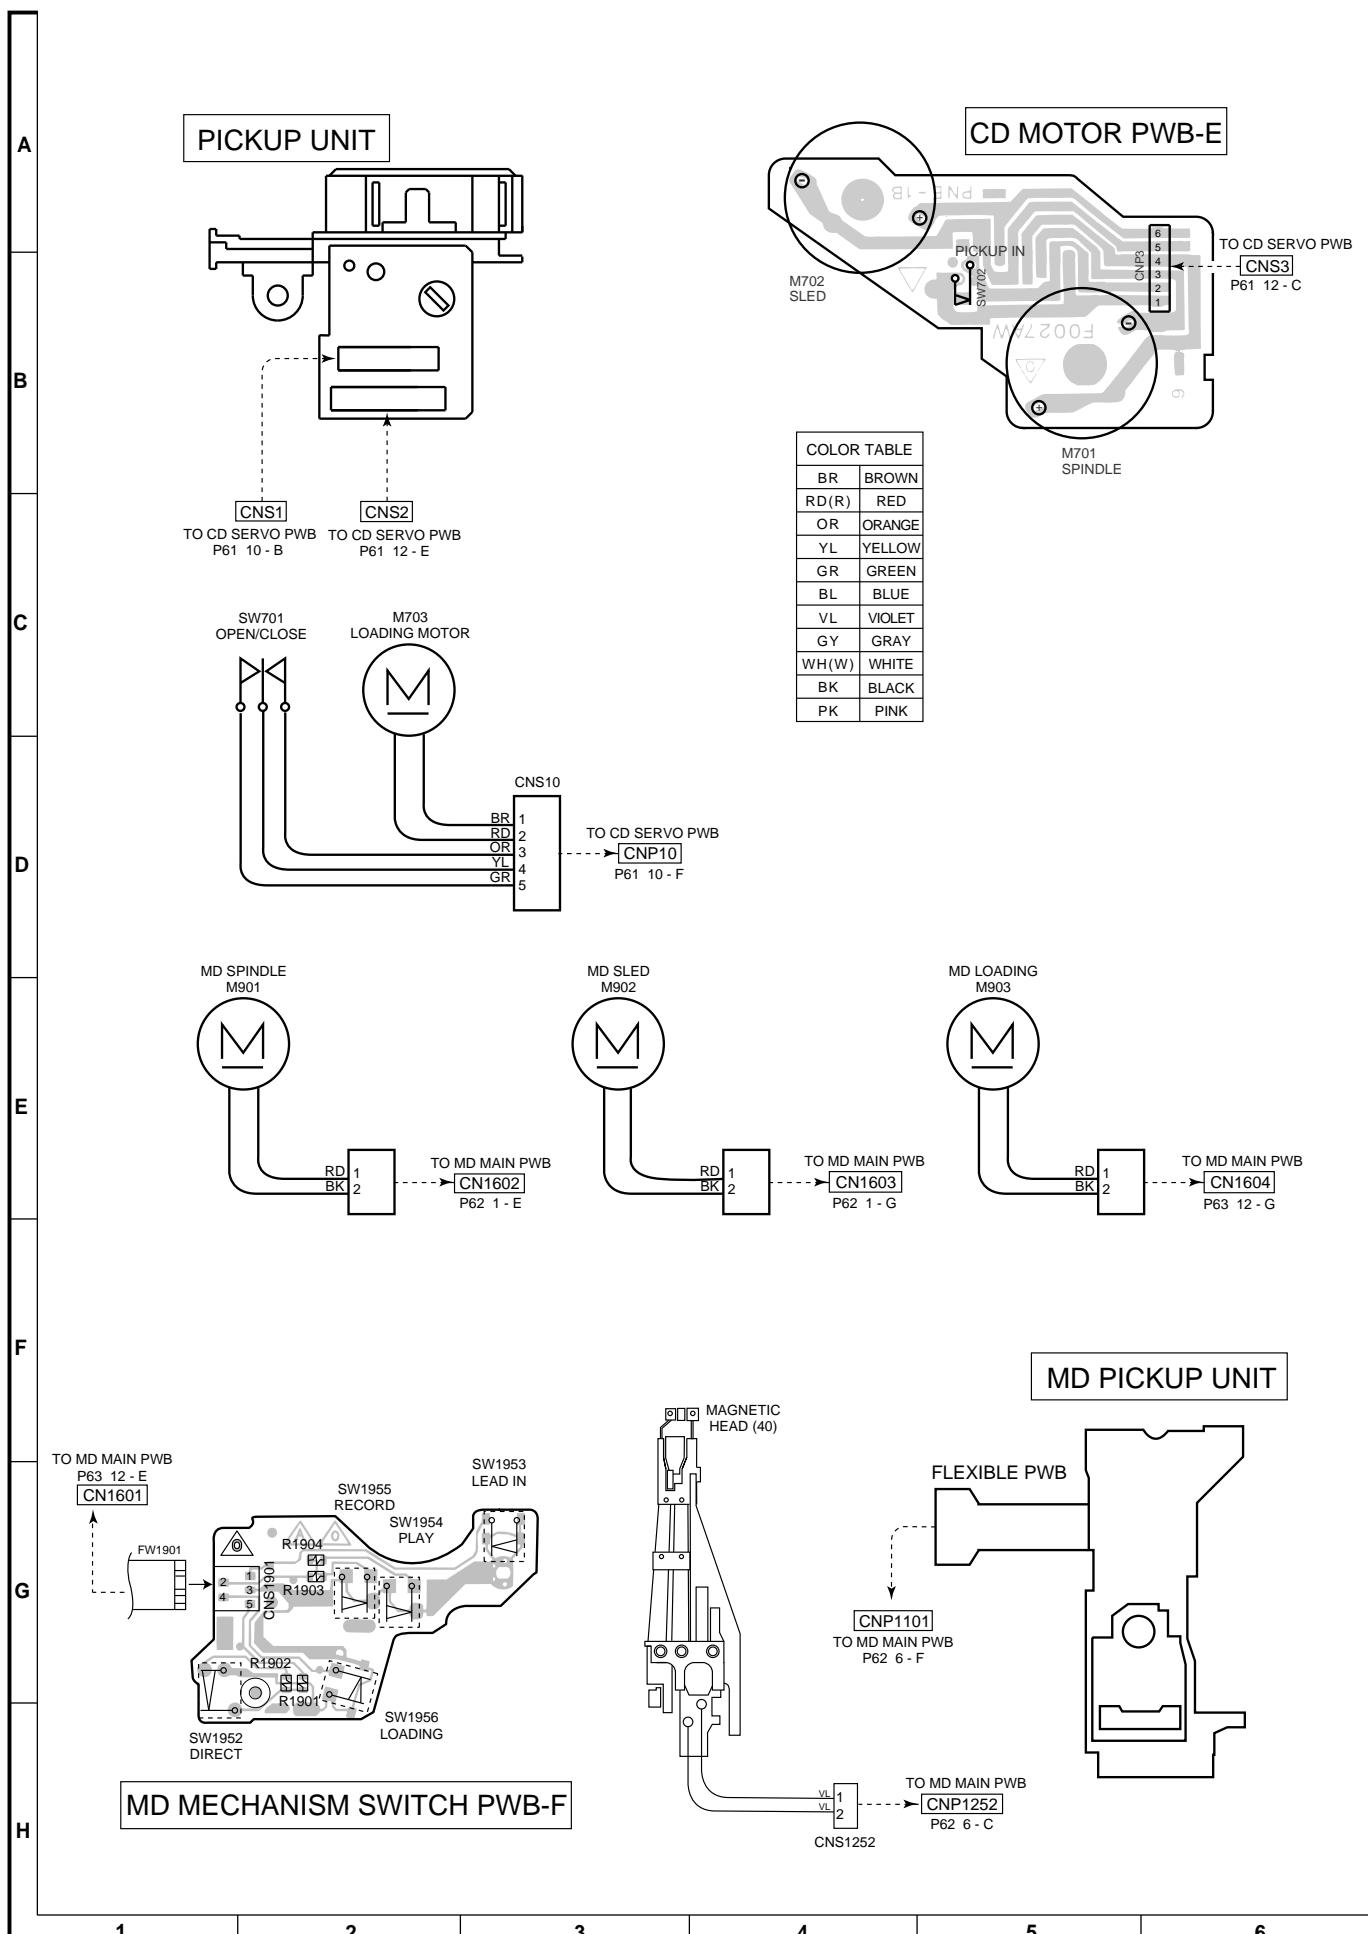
WIRING SIDE OF P.W.BOARD (9/9)
